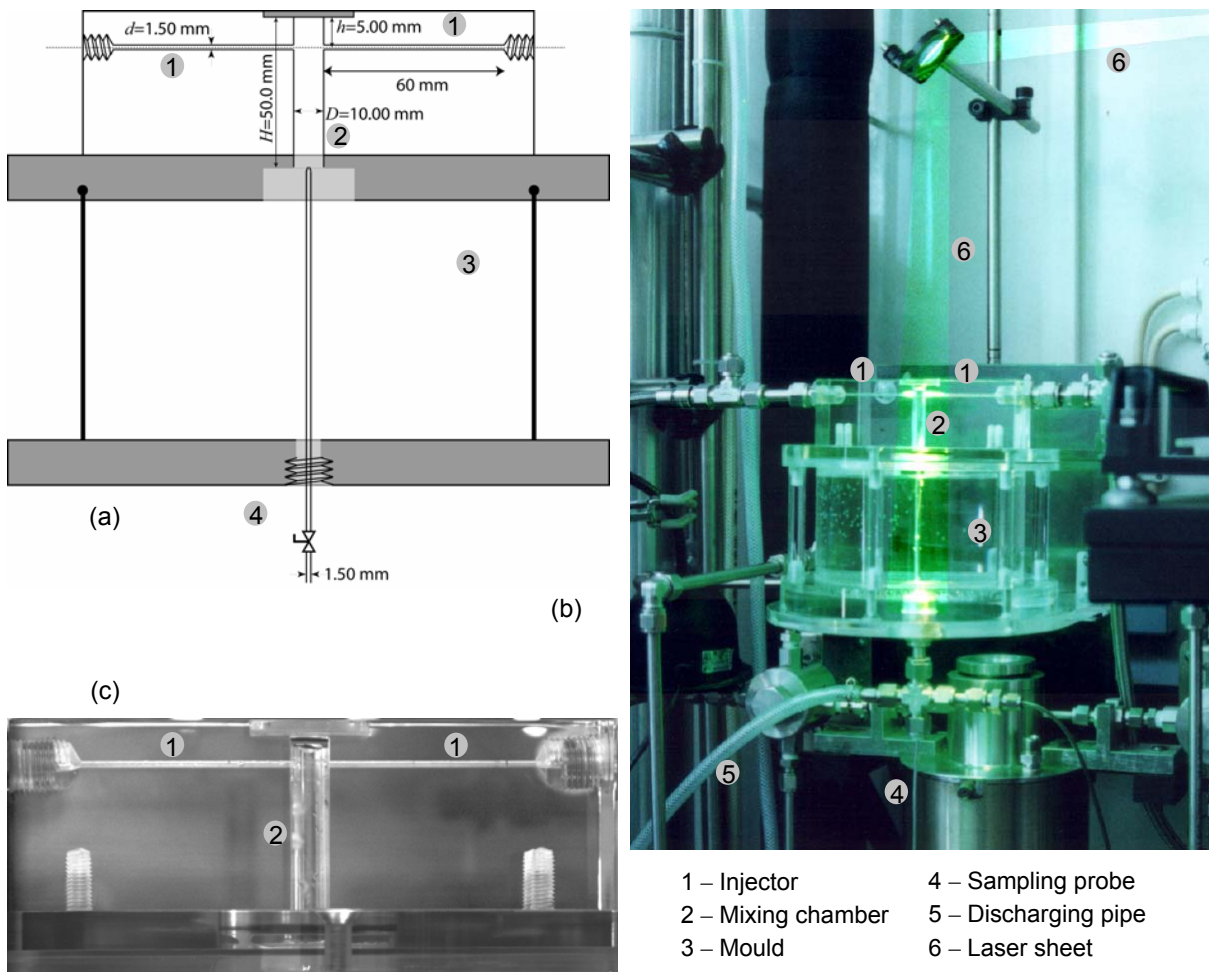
RIM machine: (a) Technical drawing of the mixing chamber and mould; (b) Photo of RIM overview; (c) Photo of mixing chamber and injectors detail (adapted from Santos (2003)).
